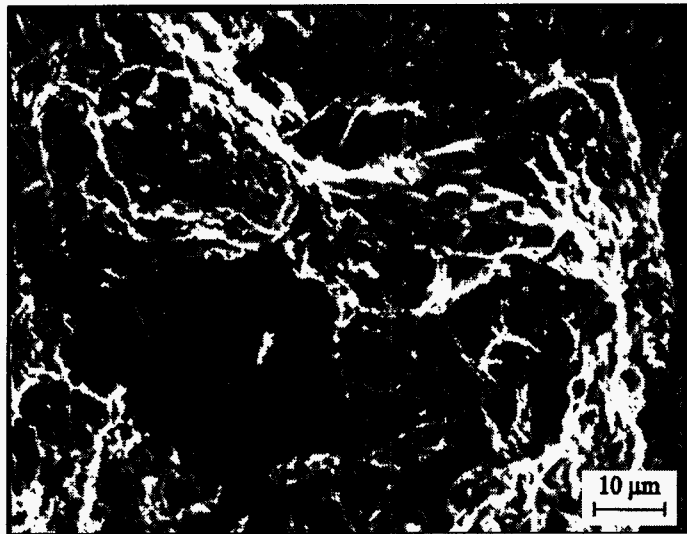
Characteristic Fracture Surface of Aluminum 356 Under Uniaxial Tensile Loading.
